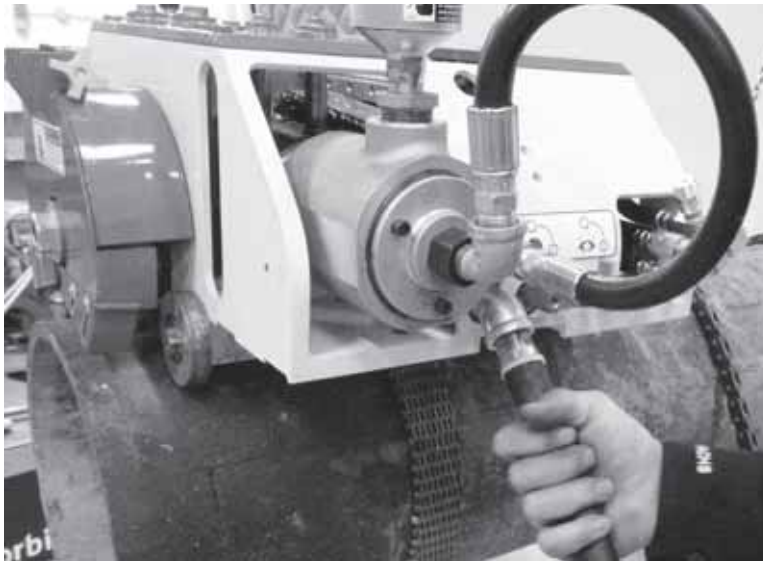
Disconnect pneumatic power by removing the air line from the connector on the machine.
